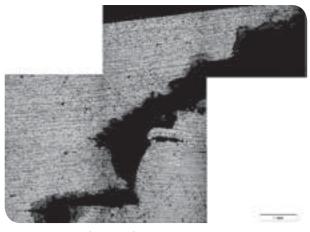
Step-like fracture of rectangular tensile test coupon transverse to as-received circumferential weld (sample 4).
